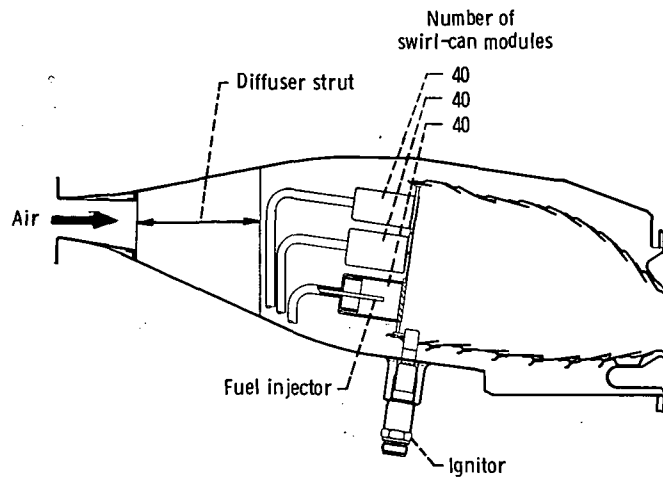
NASA swirl-can modular combustor for JT9D engine.
